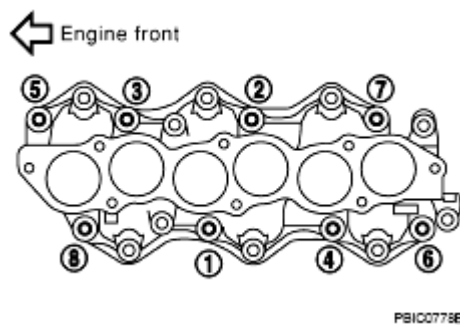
Identifying Intake Manifold Bolts Loosening Sequence
